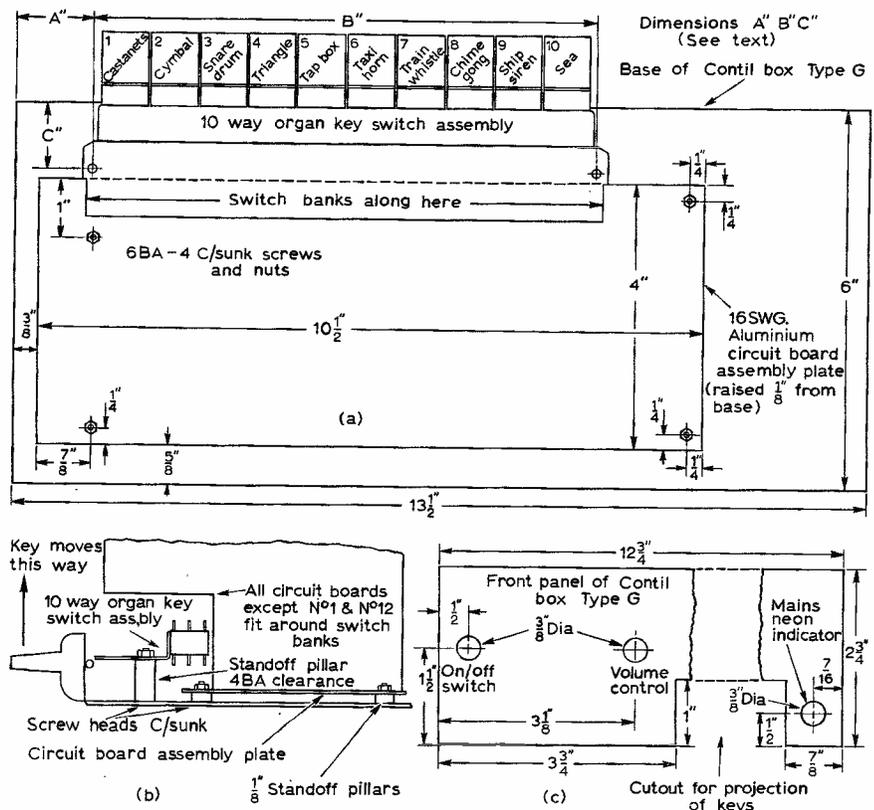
The layout for the circuit board sub-chassis, controls, power supply and key switch assembly.
